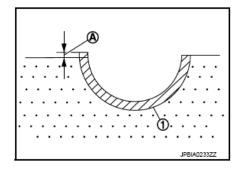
Identifying Connecting Rod Bearing Crush Height Courtesy of NISSAN MOTOR CO., U.S.A.
